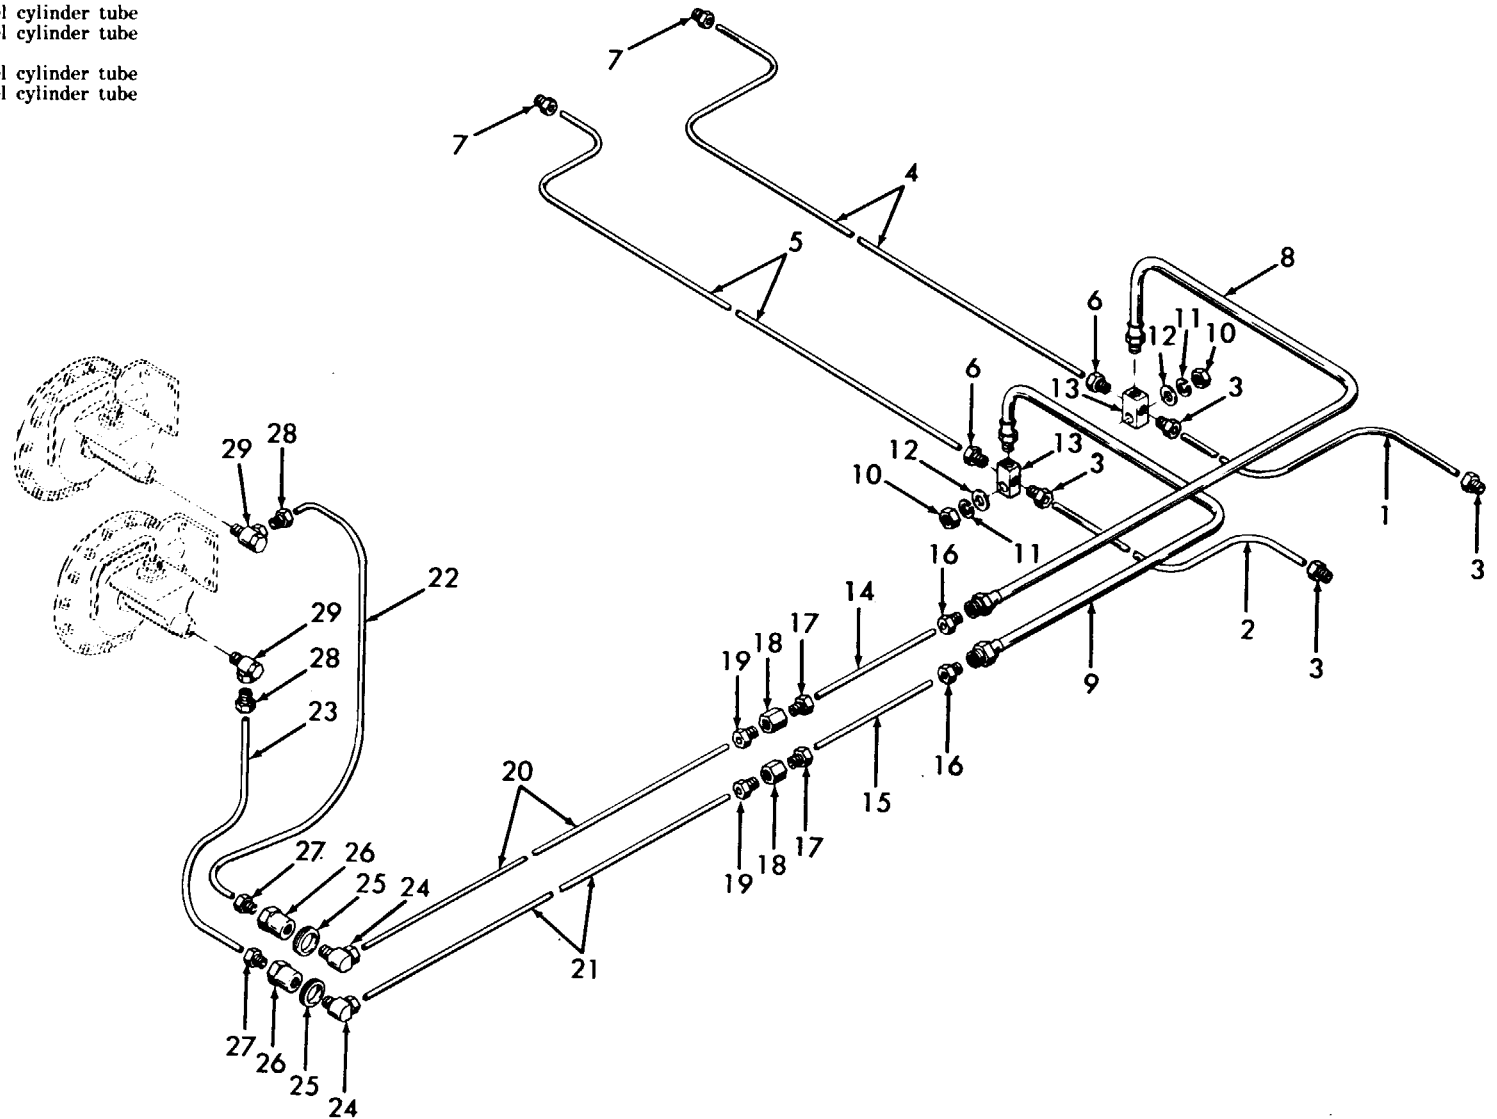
Brake hydraulic lines and fittings, exploded view.
